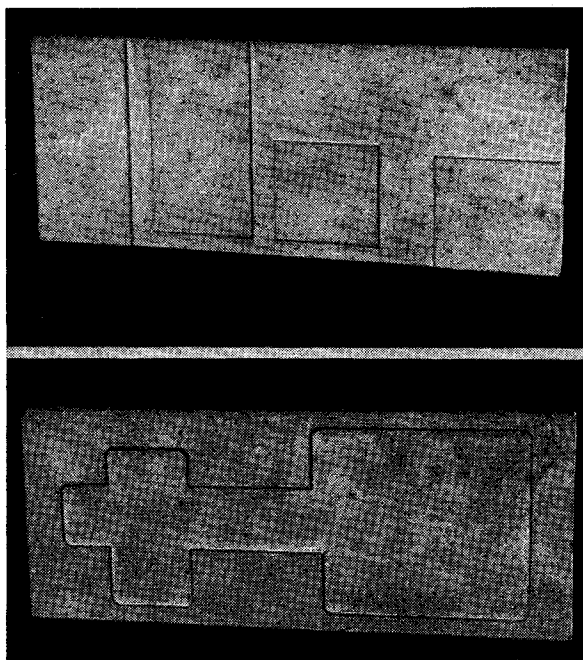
The cast aluminium bedplate: Above—the upper surface; Below—the under side of the casting
